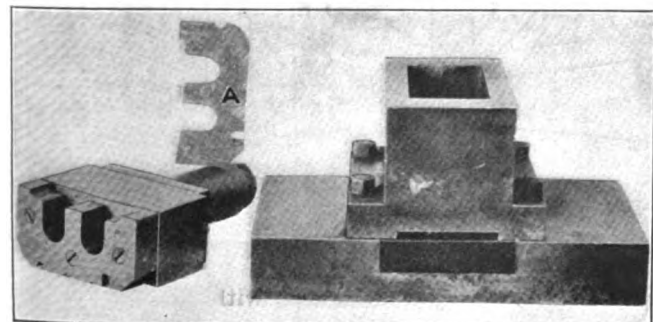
TOOLS FOR PUNCHING M. C. B. GAGES
